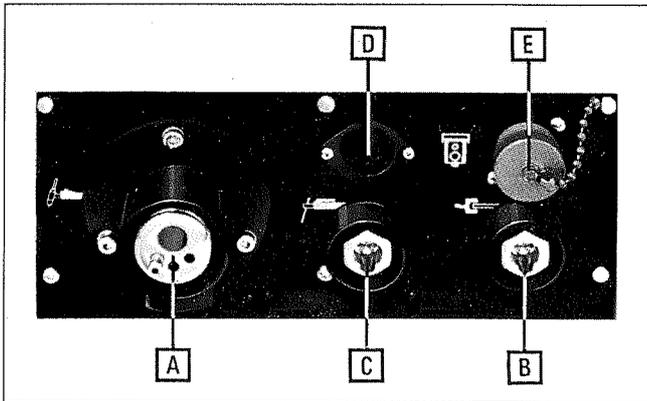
Torch/welding-cable connection points on front of the machine
